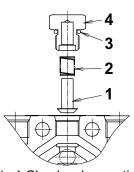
Check valve section (Blade, Swing, Arm, Boom Swing, Boom and Bucket Sections)
